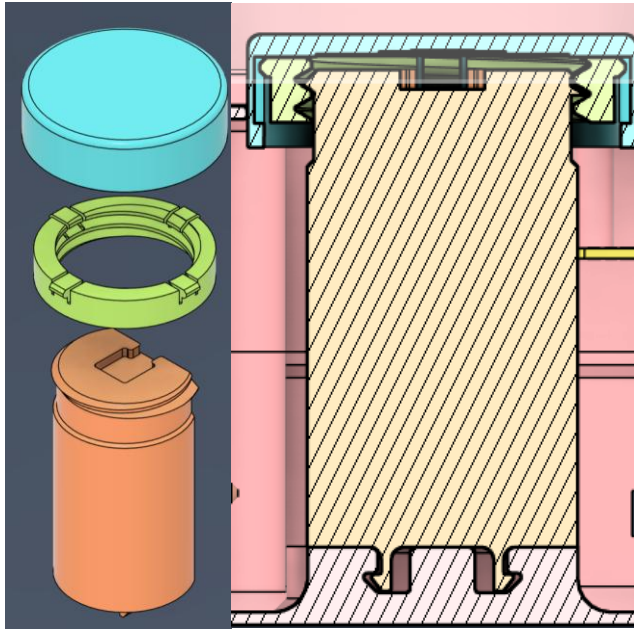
Screenshots of the direct access button assembly. Left: an exploded view of the base, insert, and cap. Right: Assembled view showing the base inserted into the enclosure bottom.
